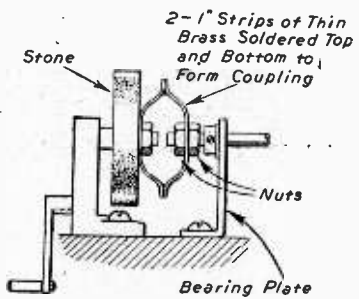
A simple geared grindstone may be coupled to the winder (shown below in Fig. 4), as indicated here.
